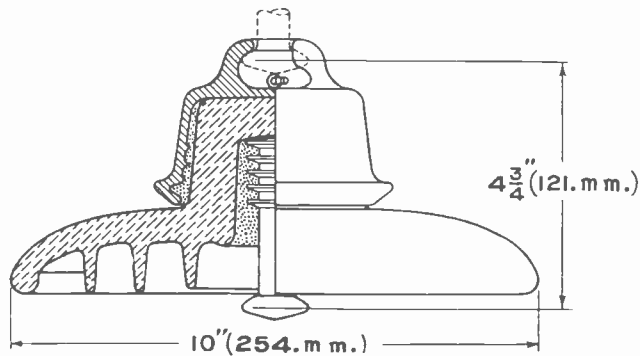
Sectional view of a suspension type insulator unit showing how the metal cap and pin are securely cemented to the porcelain insulator disk. Courtesy Ohio Brass Co.
